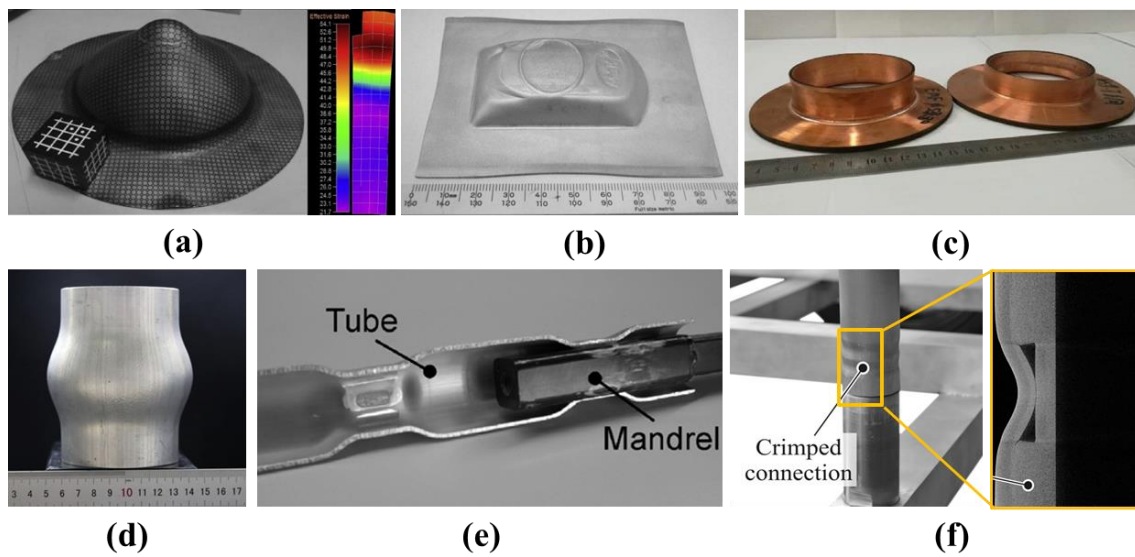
Components processed by electromagnetic forming: (a) die-less sheet free bulging [186], (b) sheet stamping [187],(ASEM Digital Collection)(c) circular hole flanging [188], (d) tube bulging [189], (e) tube compression [190], (f) tube joining [191].
